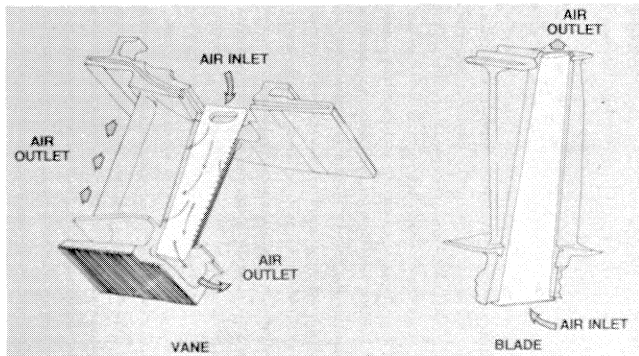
Second Stage Turbine Vane and Blade Cooling.
